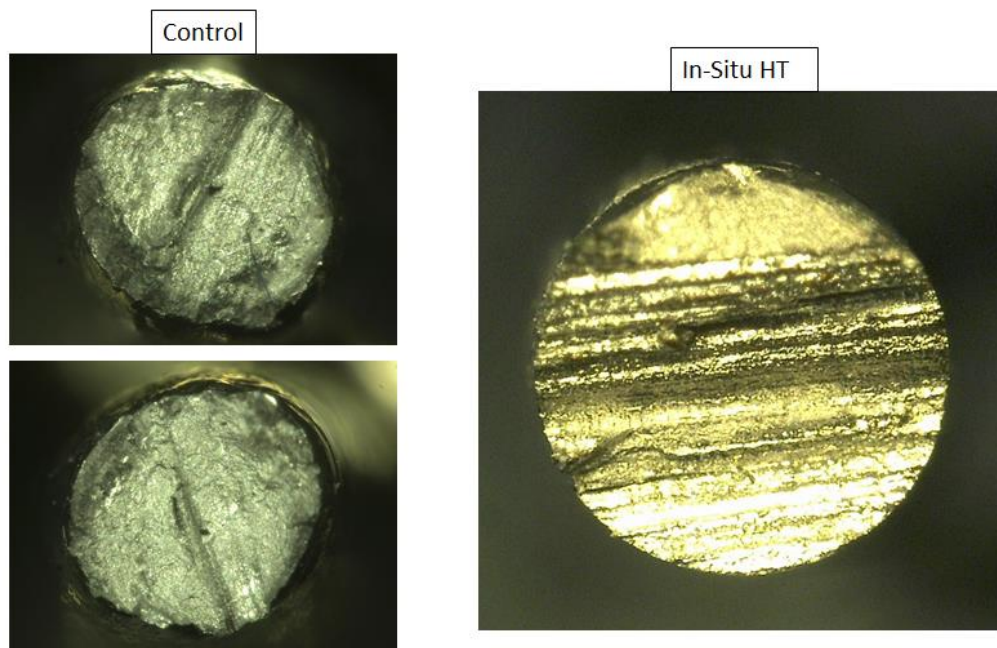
LOM of fracture surfaces for the (Left) control sample (Build 16A from §VIII.4) and (Right) ISHT sample.
